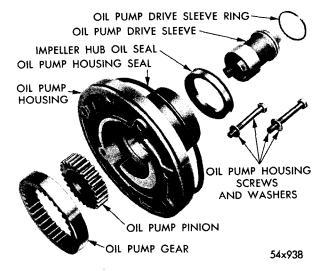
Oil Pump Housing Assembly (Exploded View)
